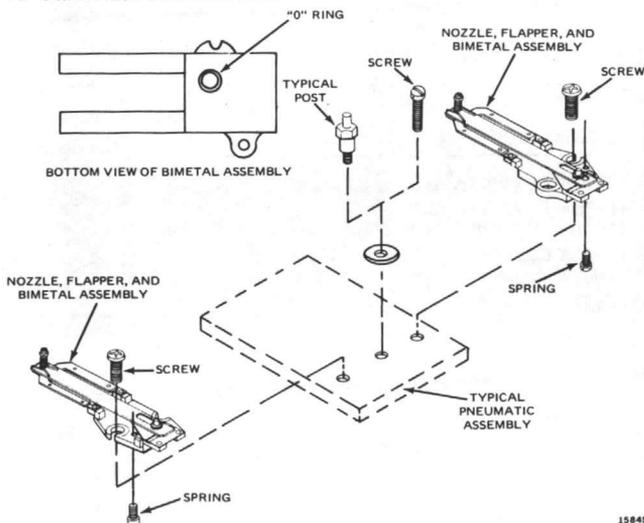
Nozzle, Flapper, Bimetal Assembly Replacement.
